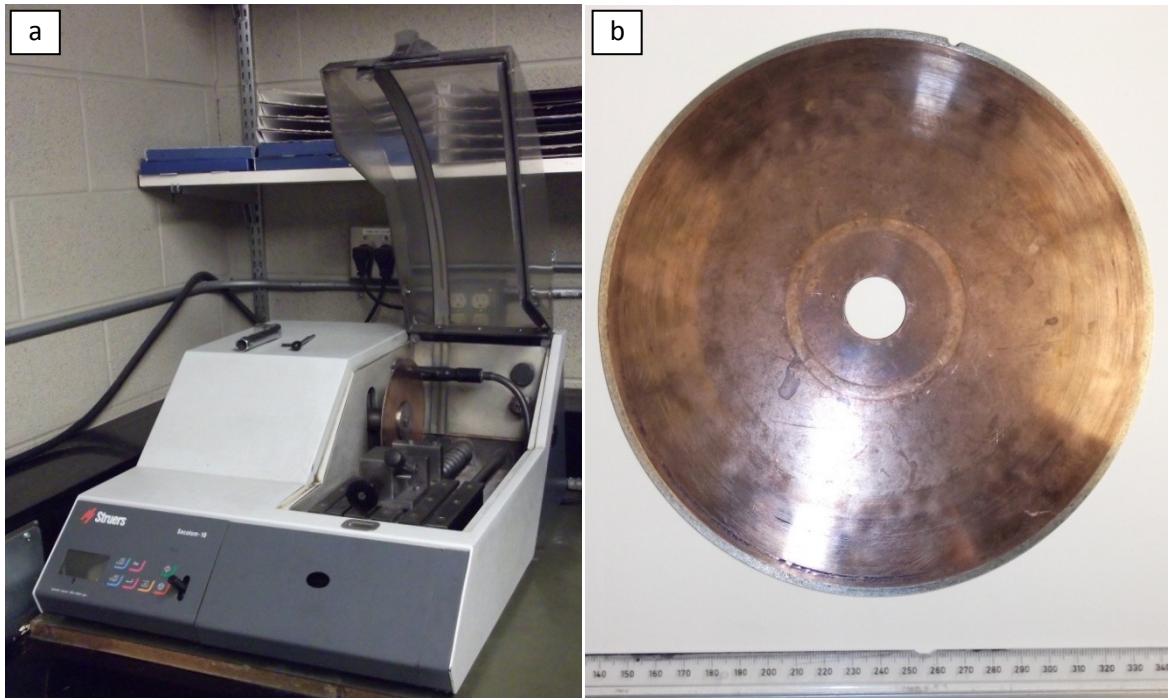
(a) Struers Secotom-10 cutting apparatus and (b) diamond coated metal cut-off wheel.
